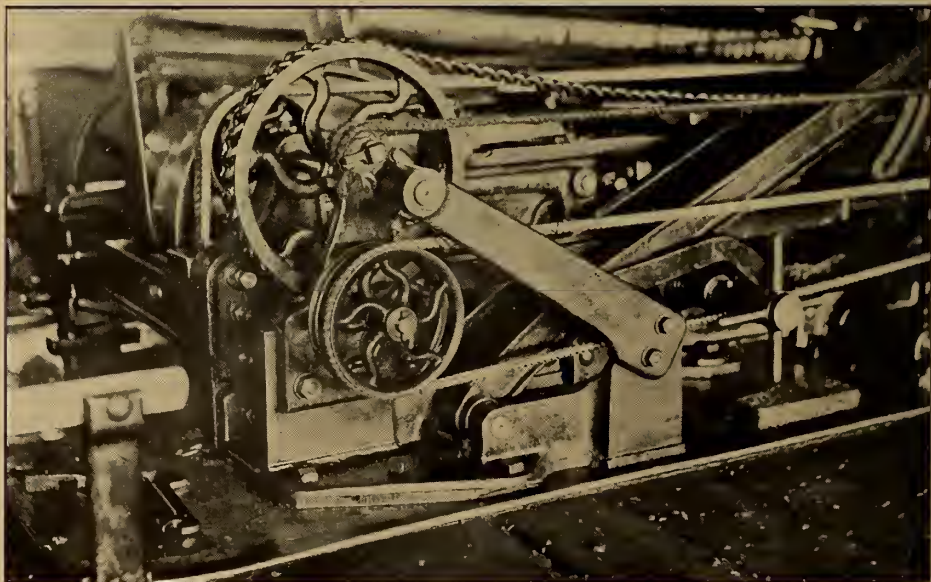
CHAIN WHEEL ON TWINER HEADSTOCK
